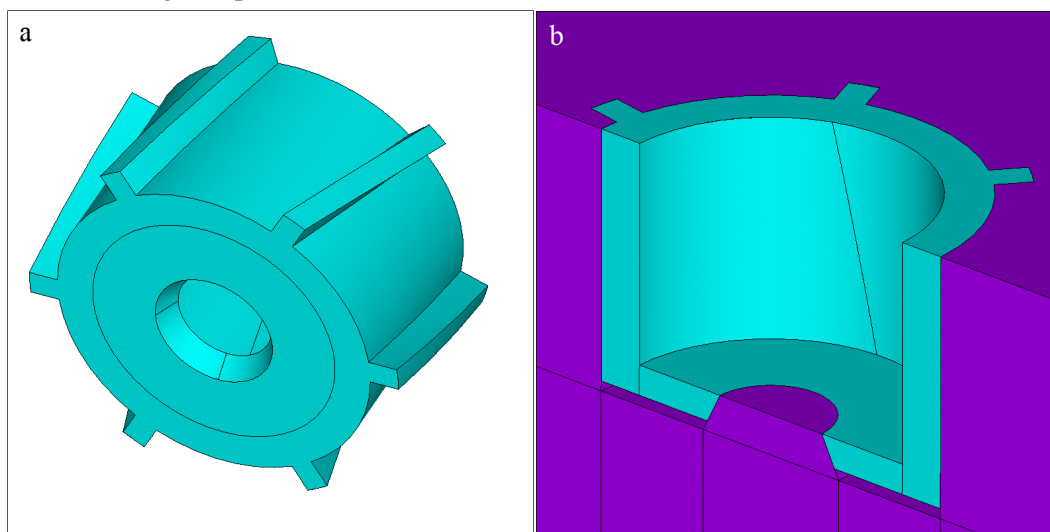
3-D geometry of cast iron thimble and section of the stub hole.
